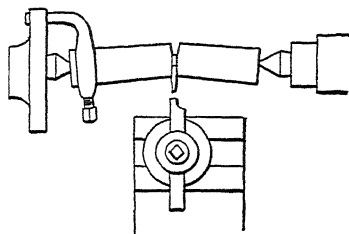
A sure way of spoiling the work and breaking the tool.
